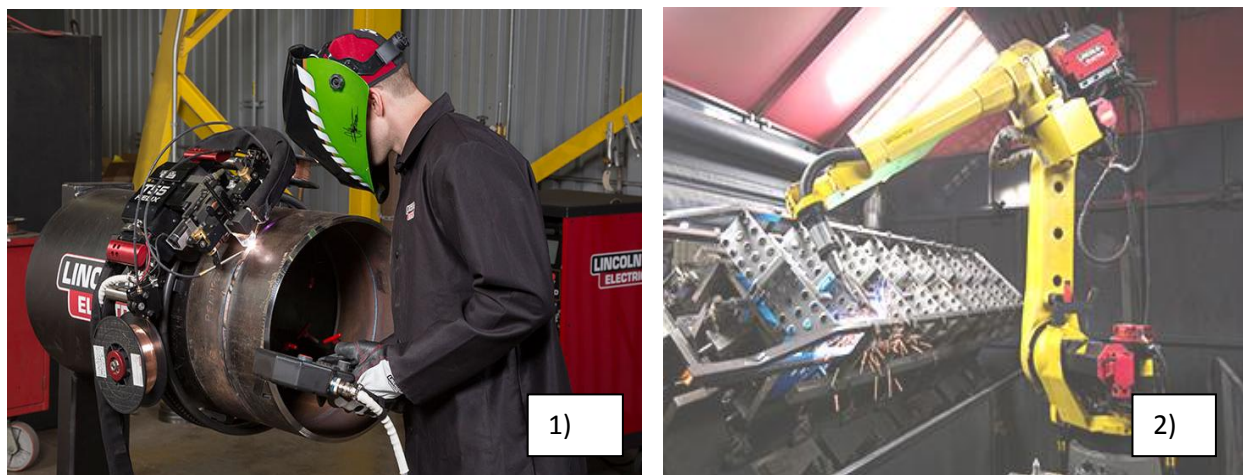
B). 1) Automated welding equipment - “welding with equipment that requires only occasional or no observation of the weld, and no manual adjustment of the equipment controls”; 2) Robotic Welding Equipment - “welding that is performed and controlled by robotic equipment” (Noruk et. al, 2001). Photograph: (courtesy of Lincoln Electric Company).
